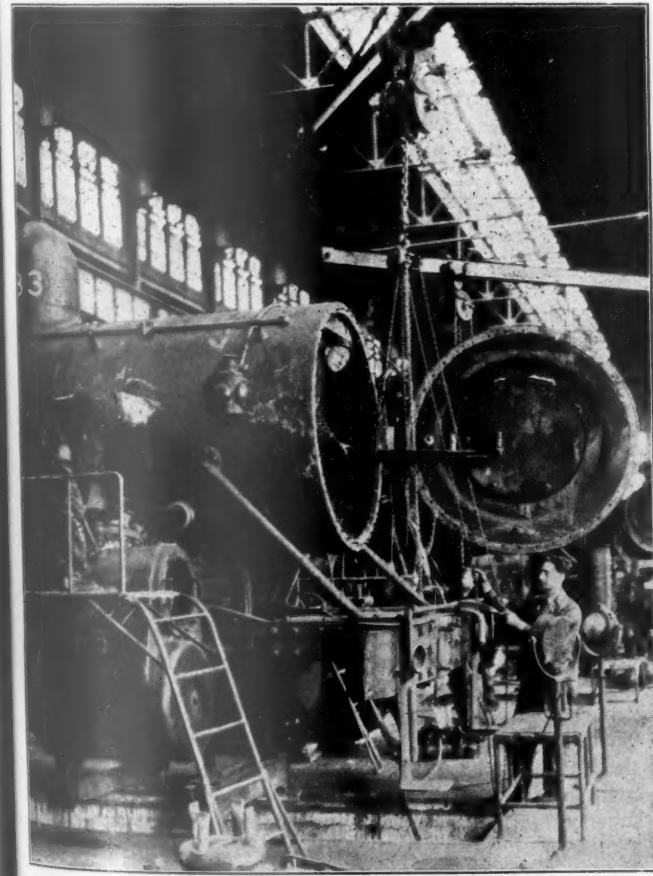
Jib Crane with Double Hoist Being Used to Install Superheater Units
